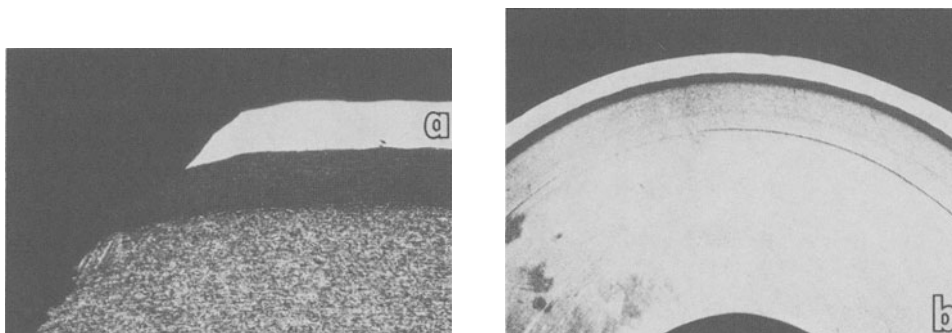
(a) Section of fracture surface of tensile specimen showing no delamination of the clad layer. Clad thickness 1.5 mm. (b) Bend test specimen - 12.5 mm thick mild steel clad with 1.5 mm thick stainless.
